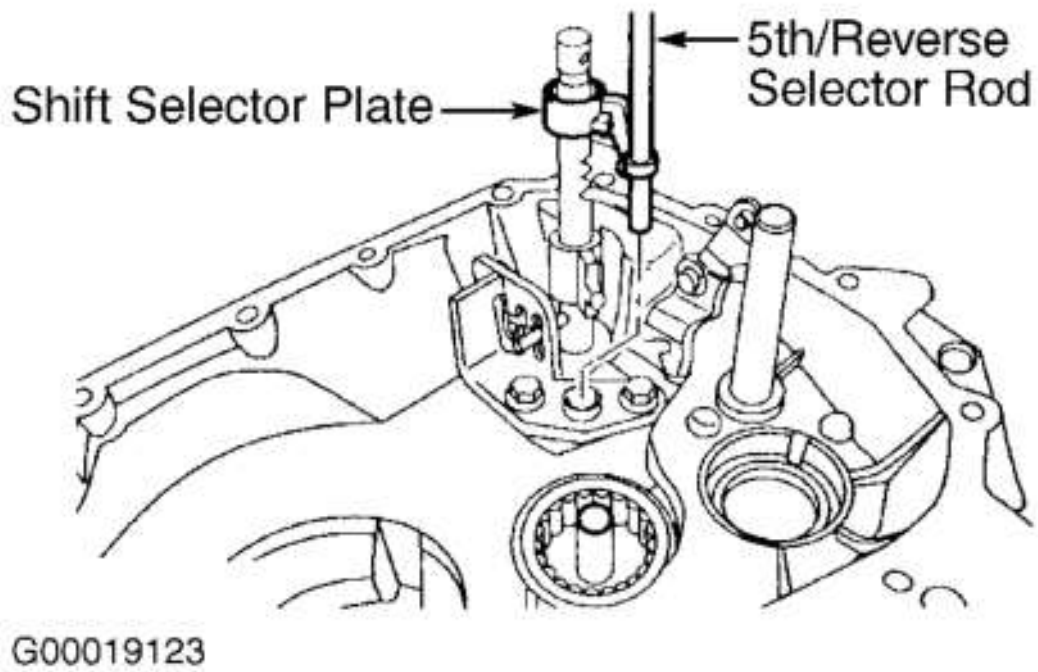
Removing 5th-Reverse Shift Selector Plate & Rod
